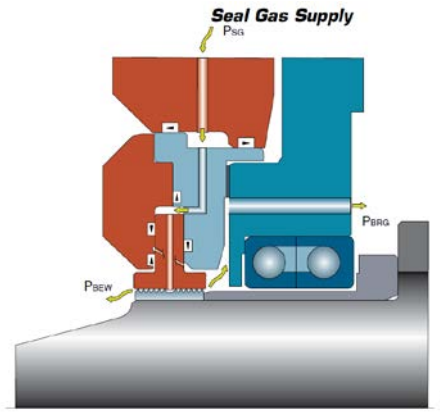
Floating Labyrinth Seal for Active Magnetic Bearings
